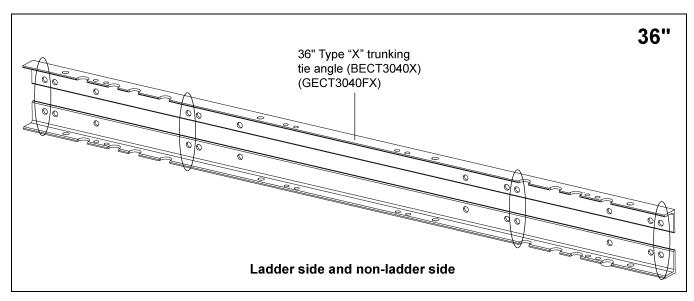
E 36" Bucket Elevator Tie Angles to Trunking Bolt Locations
